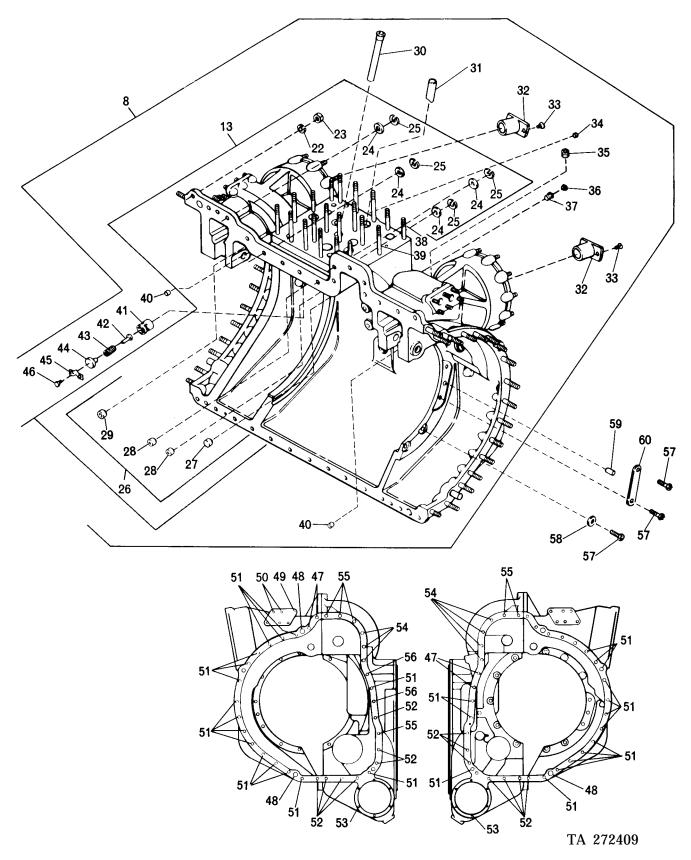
Front and rear housing assembly (Sheet 2 of 2)
